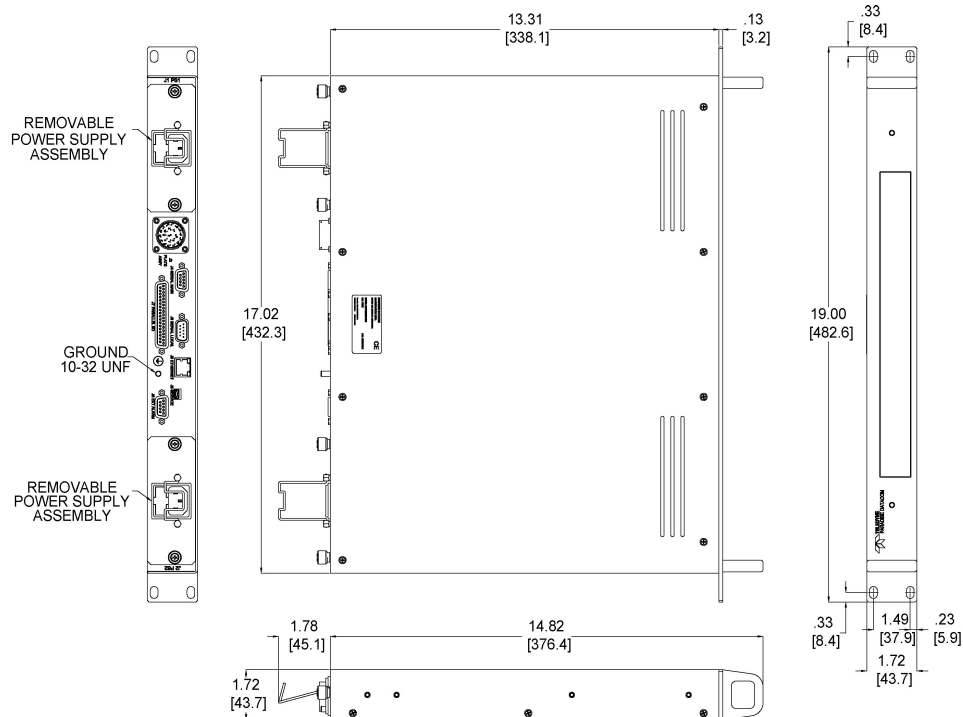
Outline Drawing, Typical Redundant System Controller Unit
